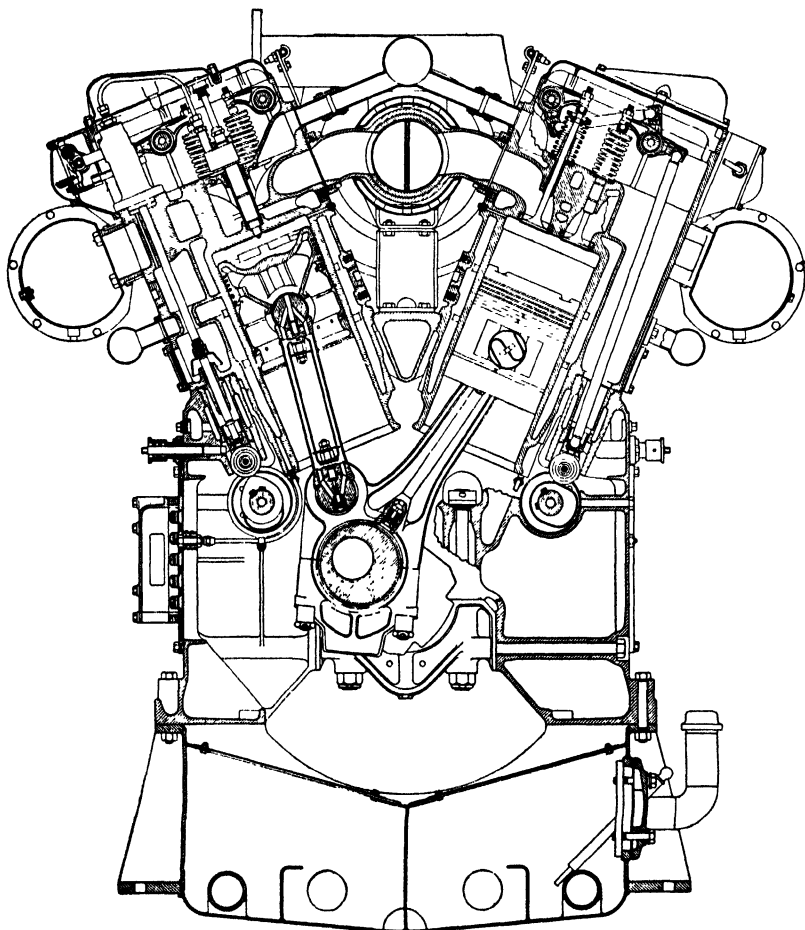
Transverse section through a 12-cylinder Cooper-Bessemer type FV-T diesel engine. Operated at 900 to 1000 rpm, this Buchi-turbocharged engine is rated at 1200 hp at 1000 rpm. (Courtesy of Cooper-Bessemer)
